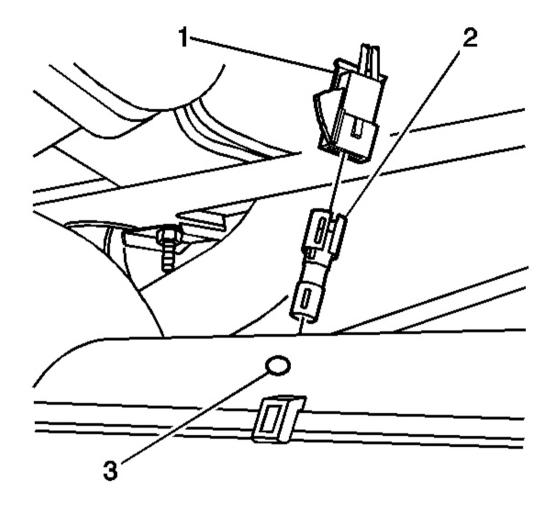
Upper Right Air Temperature Sensor & Air Distributor Duct Courtesy of GENERAL MOTORS CORP.
